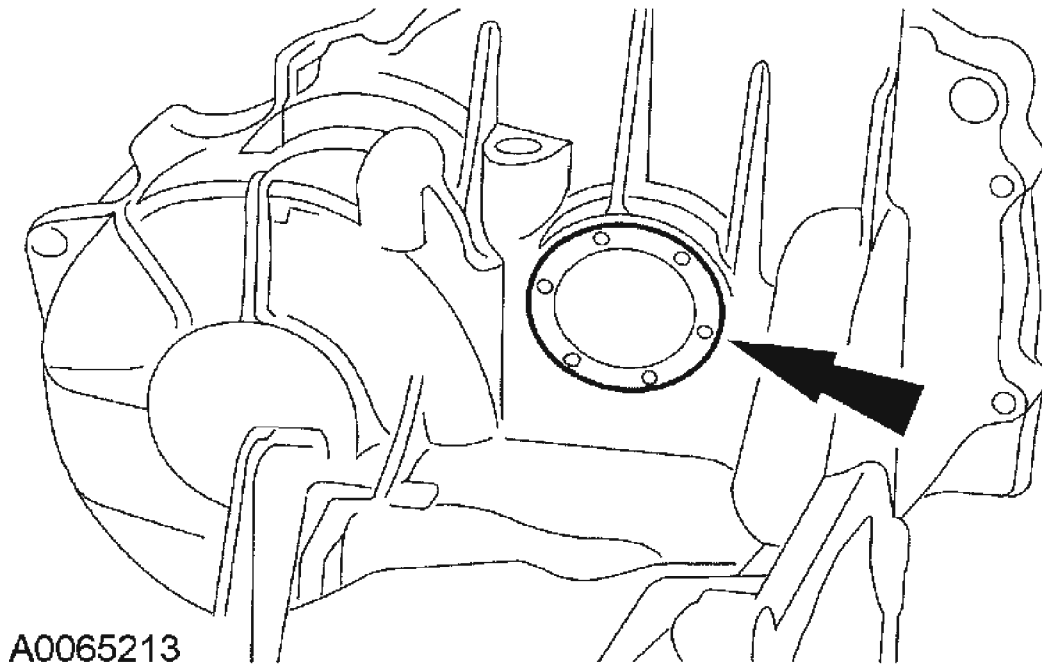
Removing Halfshaft Seals (Left-Hand Side Shown)
